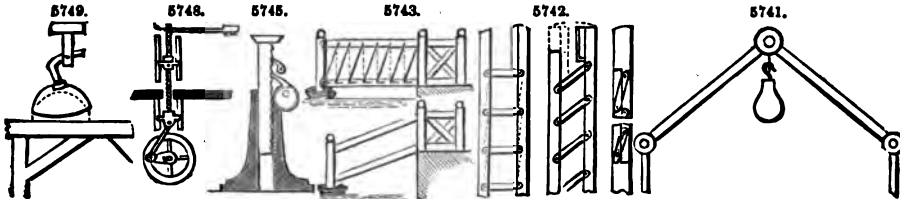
Gig-saw, the lower end connected with a crank which works it, and the upper end connected with a spring which keeps it strained without a gate.
